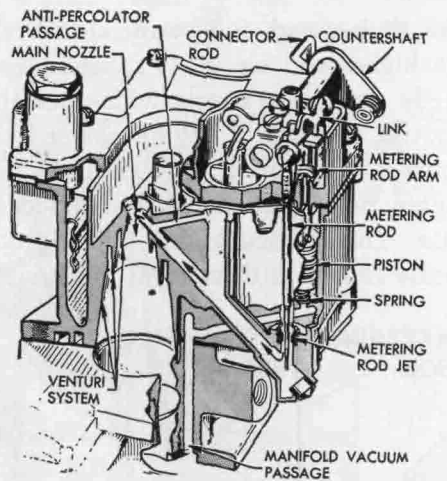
Carburetor partly cut away so that high-speed circuit of one barrel can be seen. Fuel flow is shown by arrows. The carburetor is a dual, or two-barrel, unit. (Buick Motor Division of General Motors Corporation)
